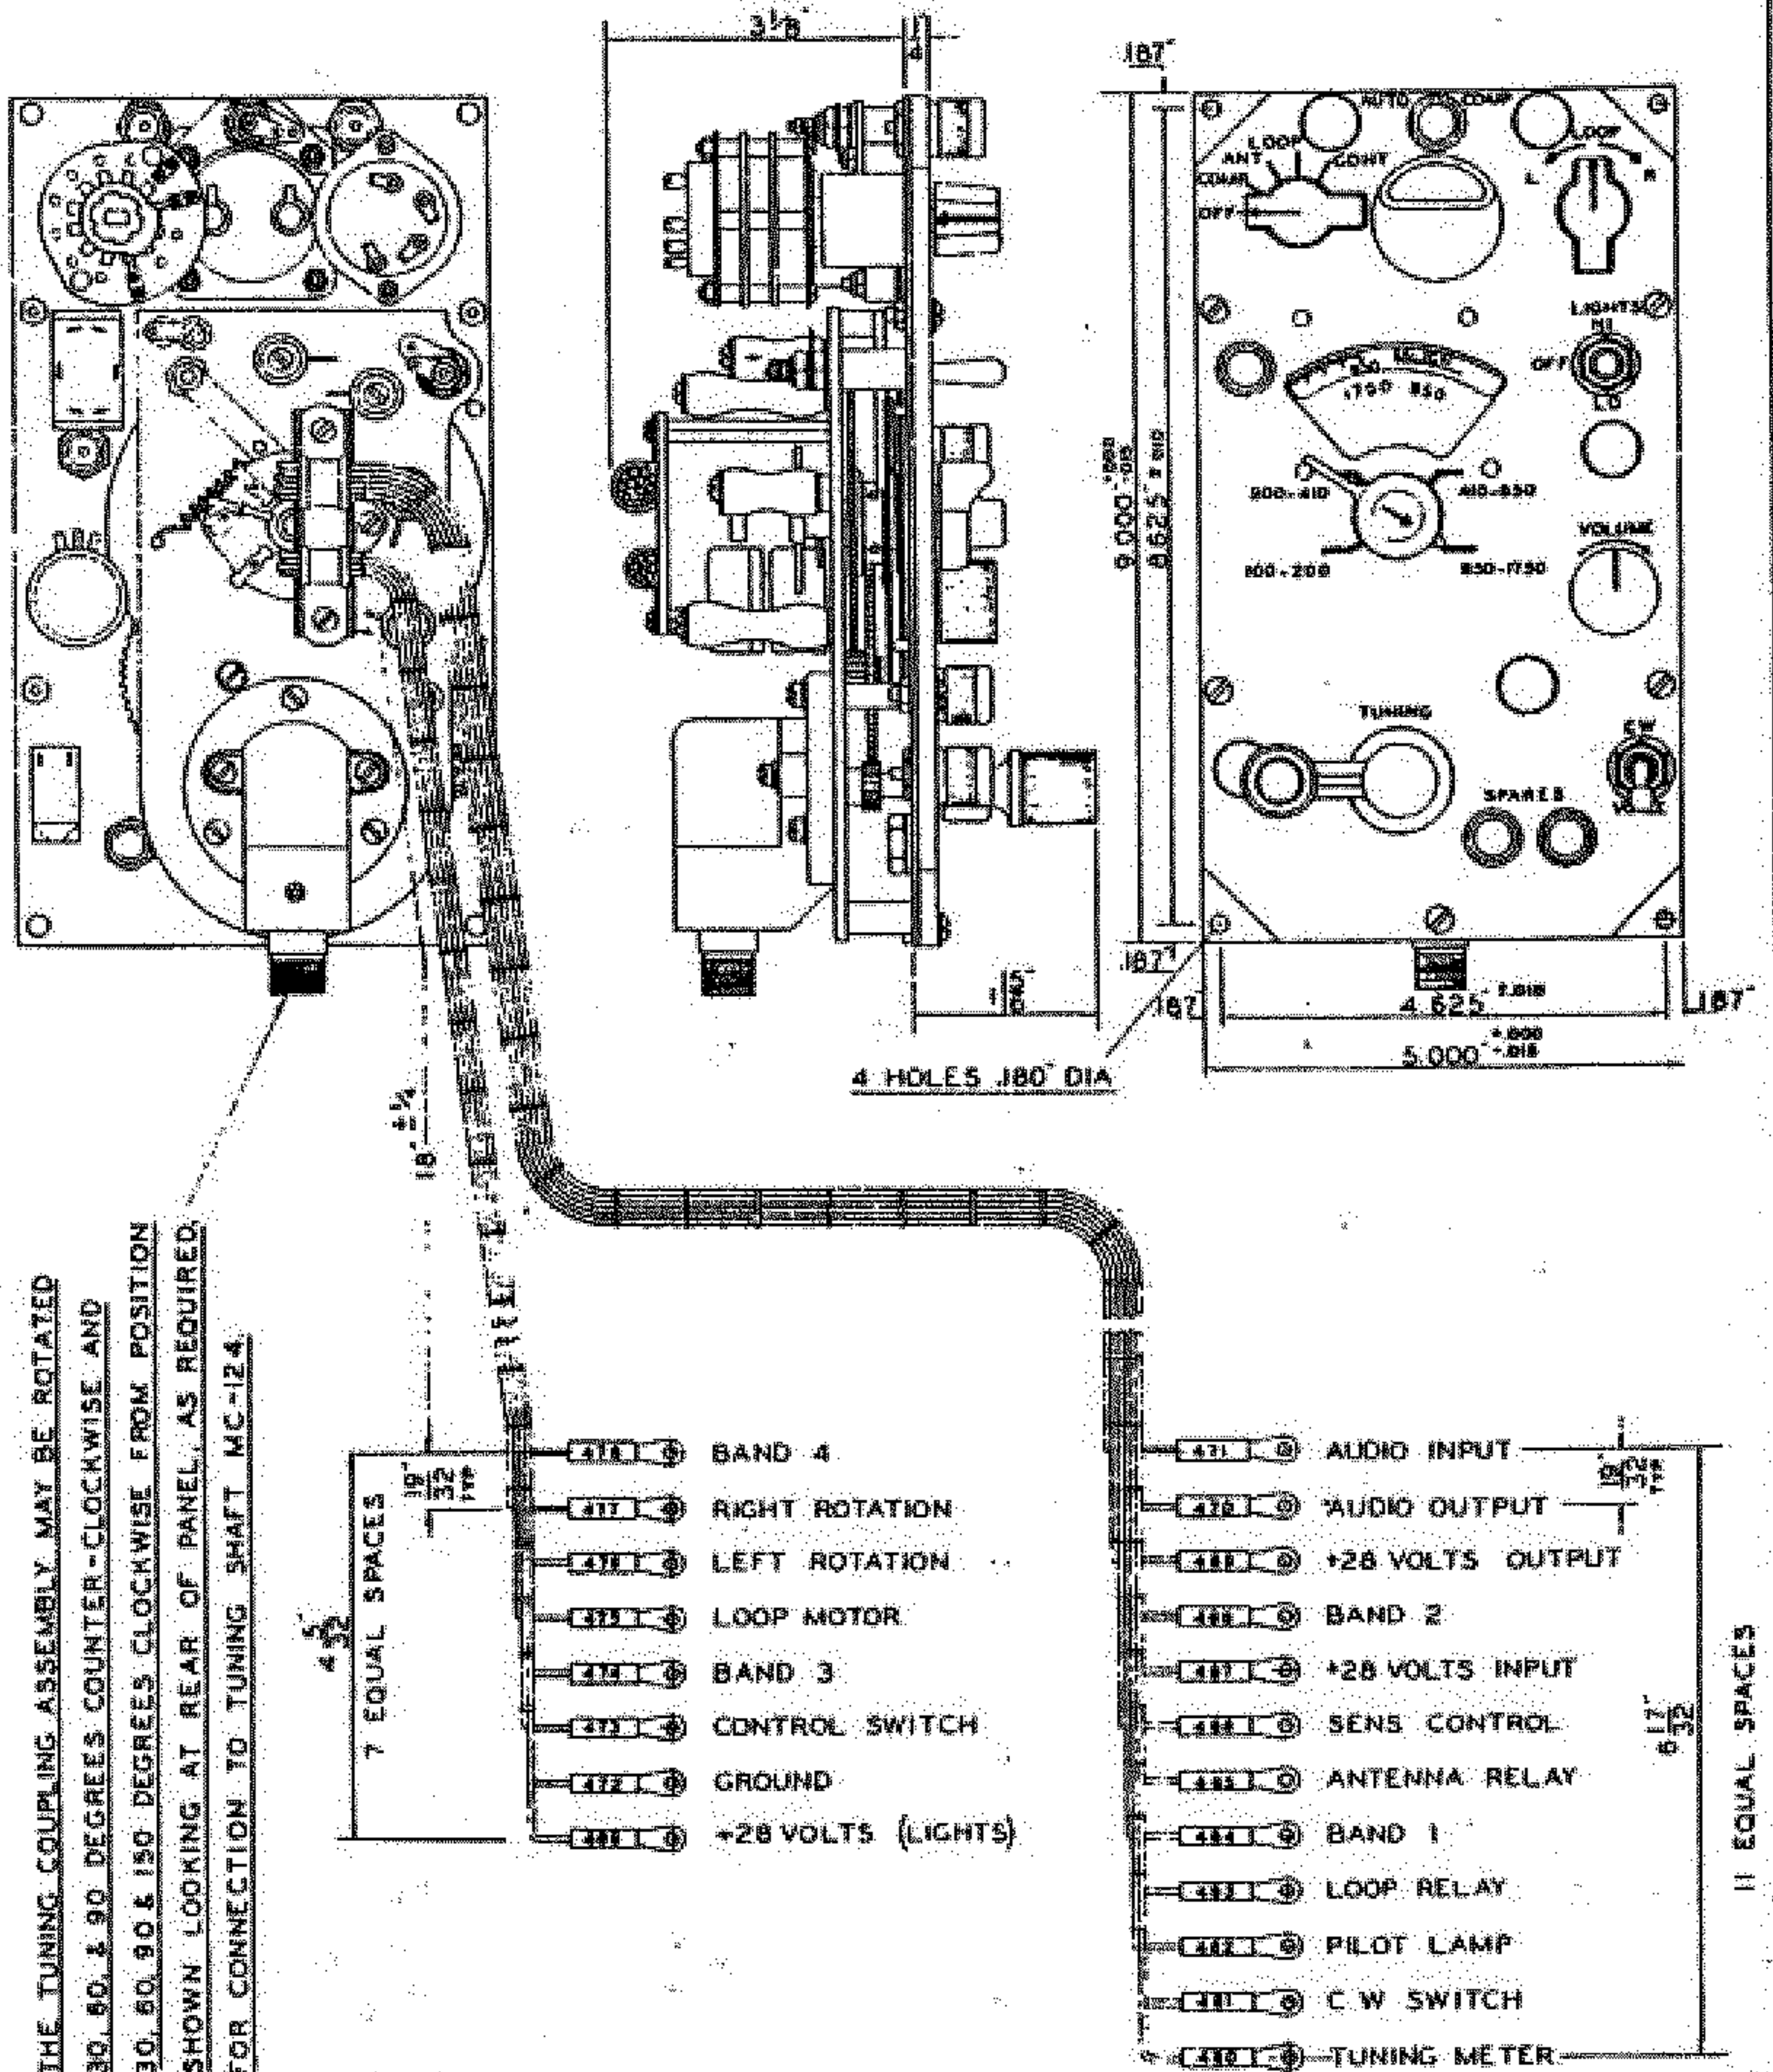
A. Control Panel C-403A/A, Outline Drawing
